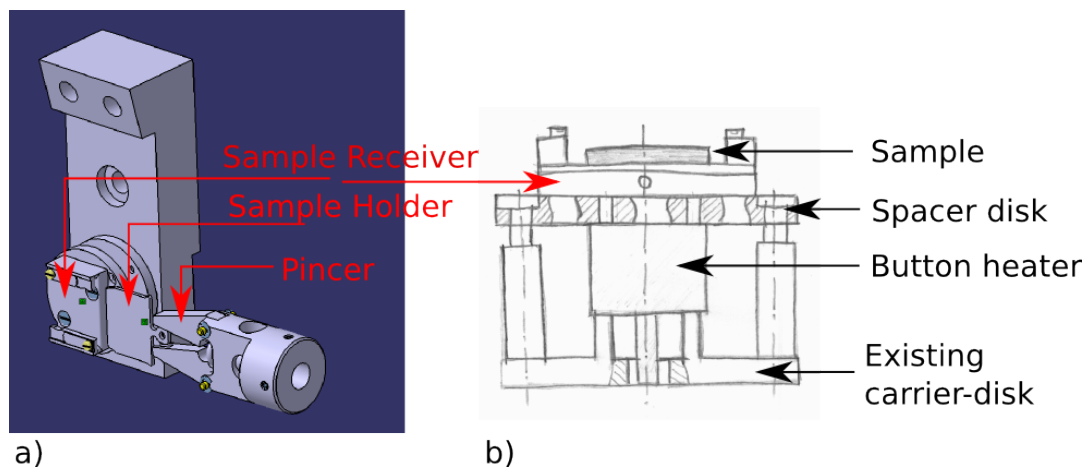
FerroVac- sample holder and transport pincer (a). Sample holder stack showing the assembly of button-heater, spacer disk and sample receiver onto the existing button heater carrier (b).
